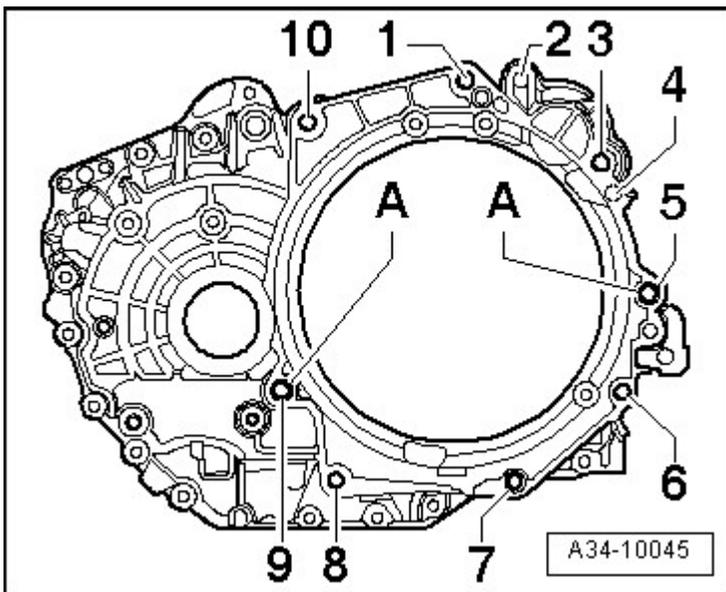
Identifying Direct Shift Automatic Transmission To Engine Mounting Bolts
